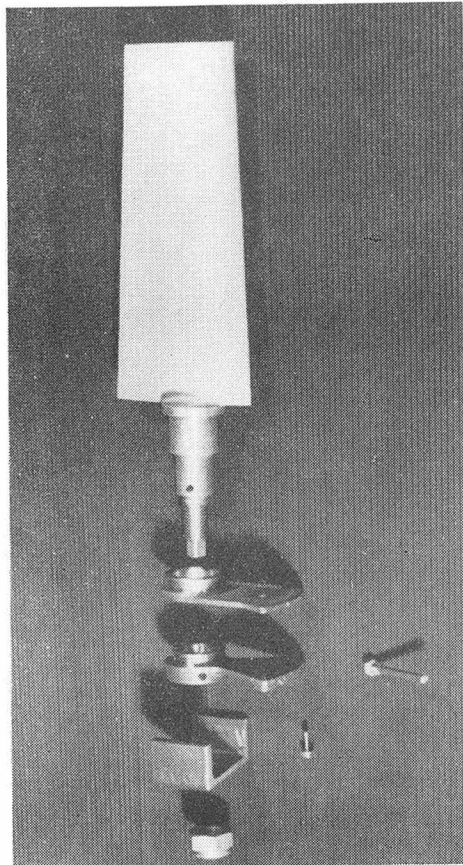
DETAIL OF BLADE FASTENING MECHANISM
